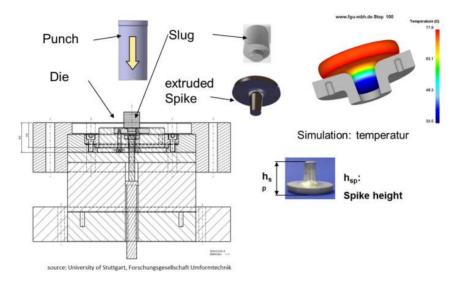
Design of the slug, the spike-test tool and the cold extruded spike
